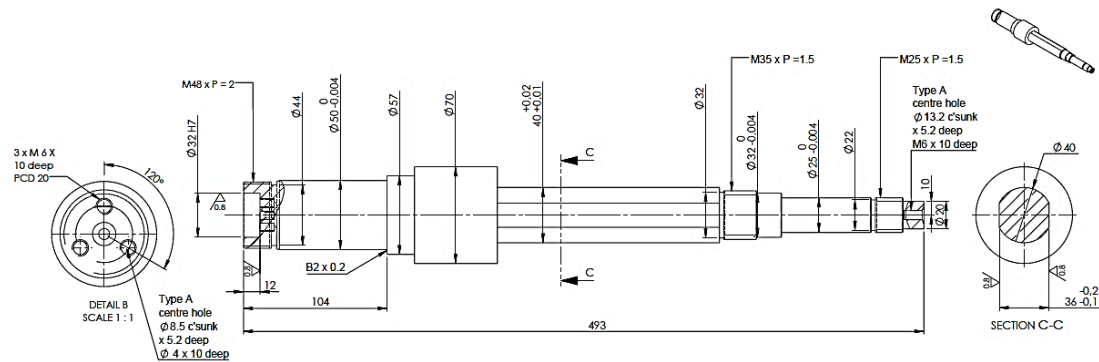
Detailed Solidworks drawing of the HSPM Generator Shaft
